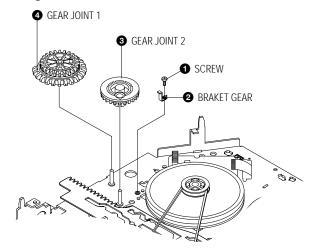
Bracket Gear, Gear Joint 1,2 Removal
